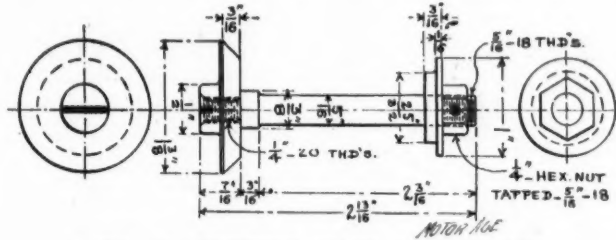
ADMISSION VALVE AND SPINDLE.
